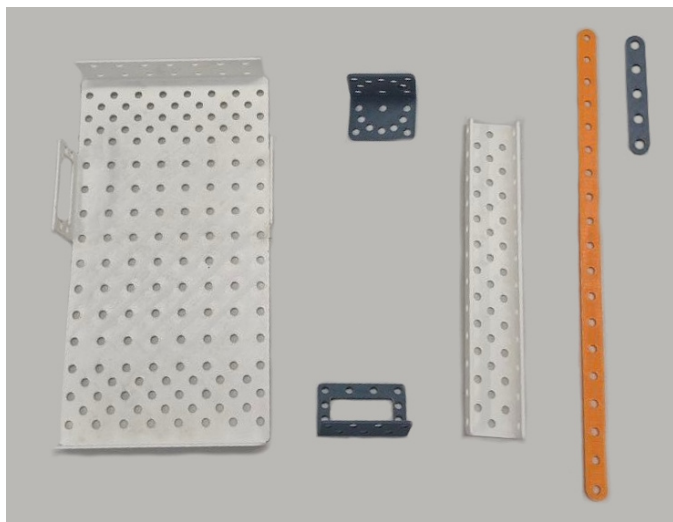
3D-printed replicas of Botball Kit components manufactured in PLA. (from Left to Right): Chassis, Servo Bracket, Angle Bracket, Channel, Strap, Servo Horn.
